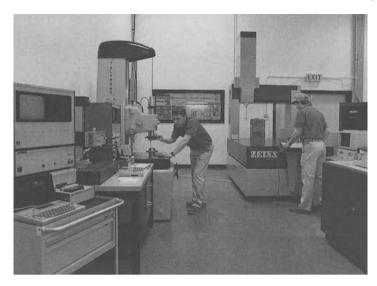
The quality control of parts – temperature-controlled environment with a comprehensive range of metrology equipment. [Courtesy of Yamazaki Mazak Ltd.]
